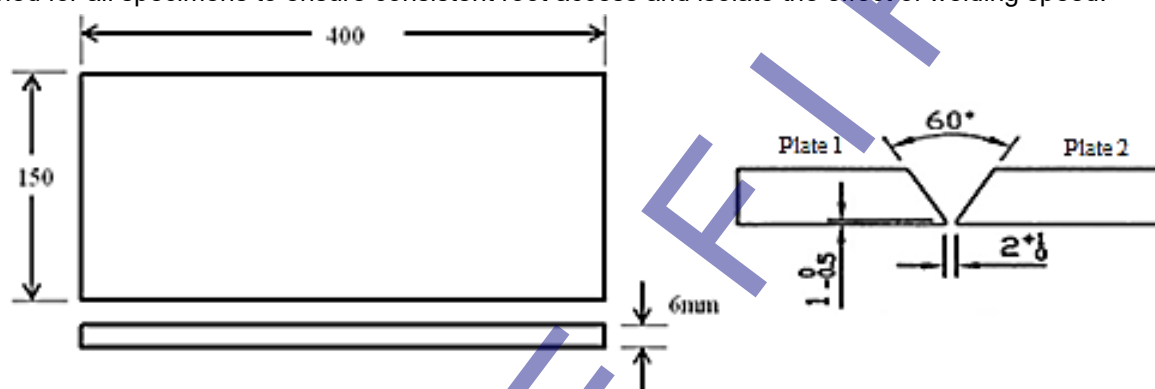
SS400 plate dimensions and single-pass V-groove butt-joint geometry (all dimensions in mm)
